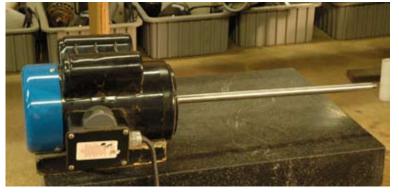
If Motor is not balanced, place Assembly sideways with Motor on piece of curved wood or other fixture for stability.
